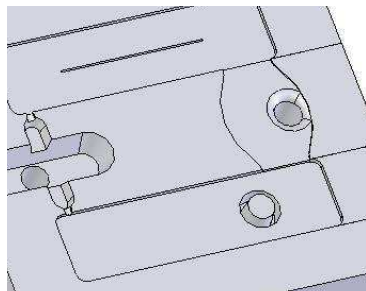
Moulding block with rib produced by laser milling and protrusion produced by micromilling
